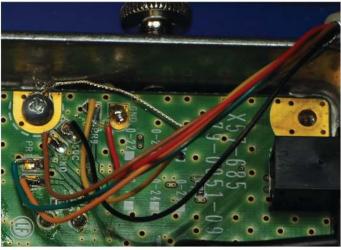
Radio with the top off showing pads and wiring in place for the 6-pin-mini-DIN pigtail.
